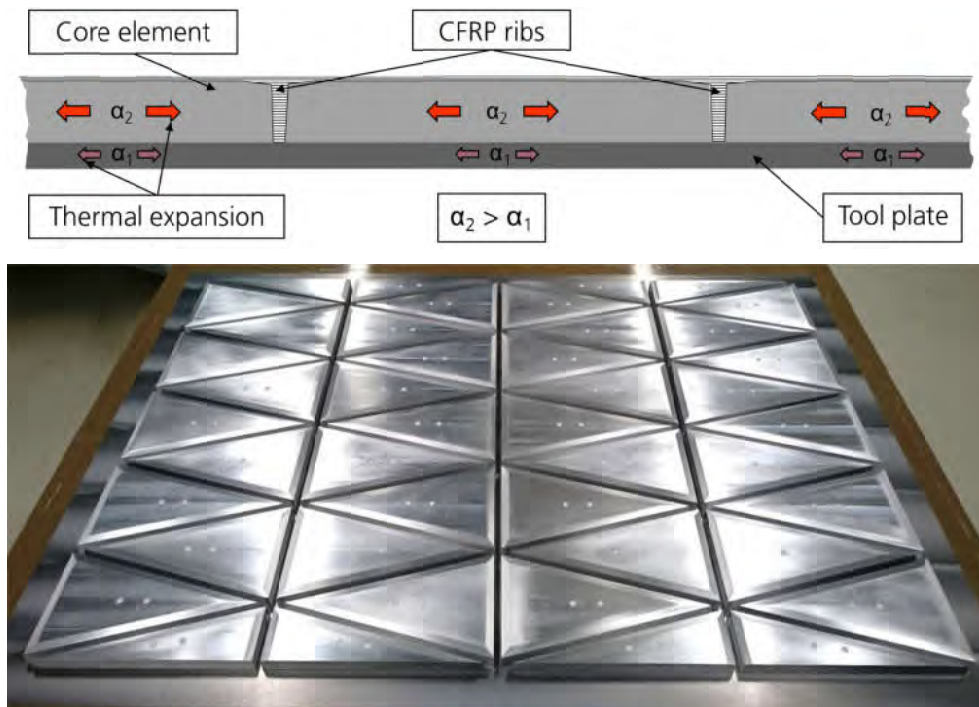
Above: Tool concept of expanding tool cores, below: manufactured aluminium tool
